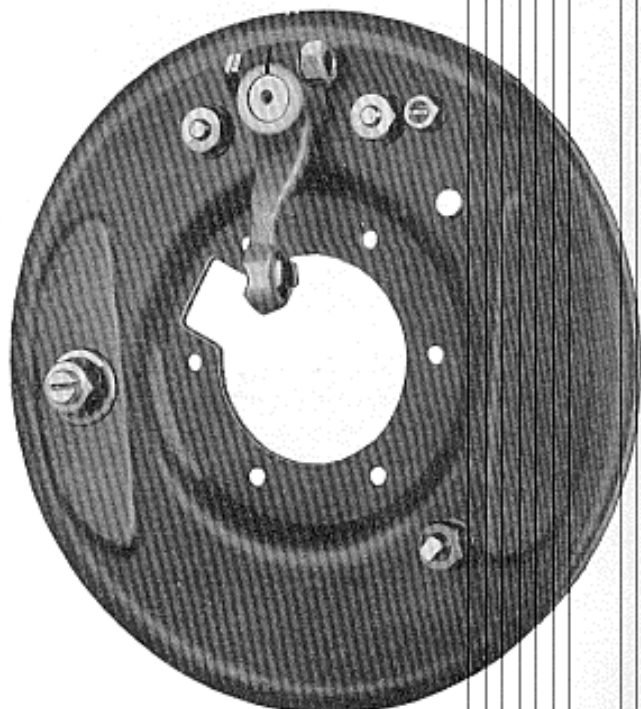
Frame side of the backing plate for same model brake as shown in Fig. N2
